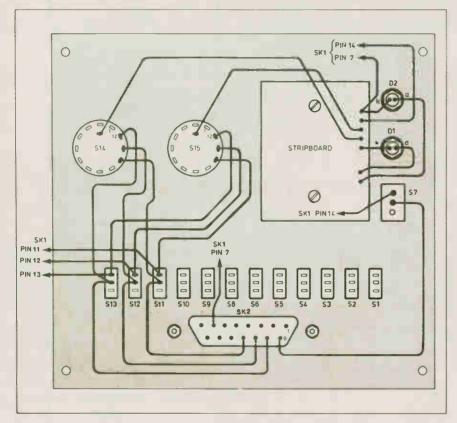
Interwiring between the front panel mounted components and the circuit board. The remainder of the "connect" and "compare" switch wiring follows the pattern shown.
